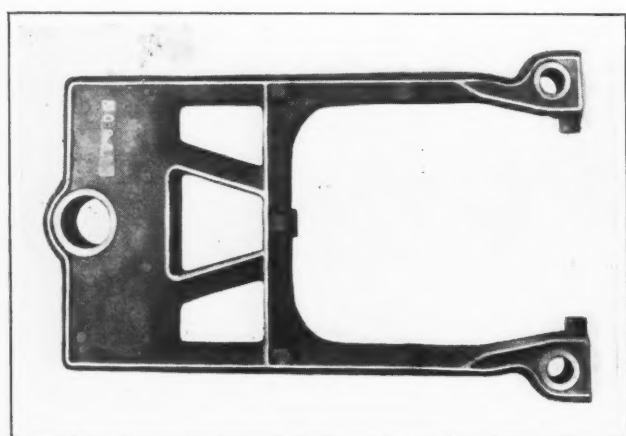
Comparatively Large Iron Casting Finished by Abrasive Disks on the Machine Shown in Fig. 1
